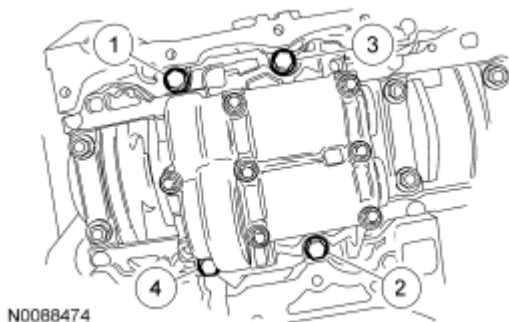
Identifying Balancer Unit Bolts Tightening Sequence
